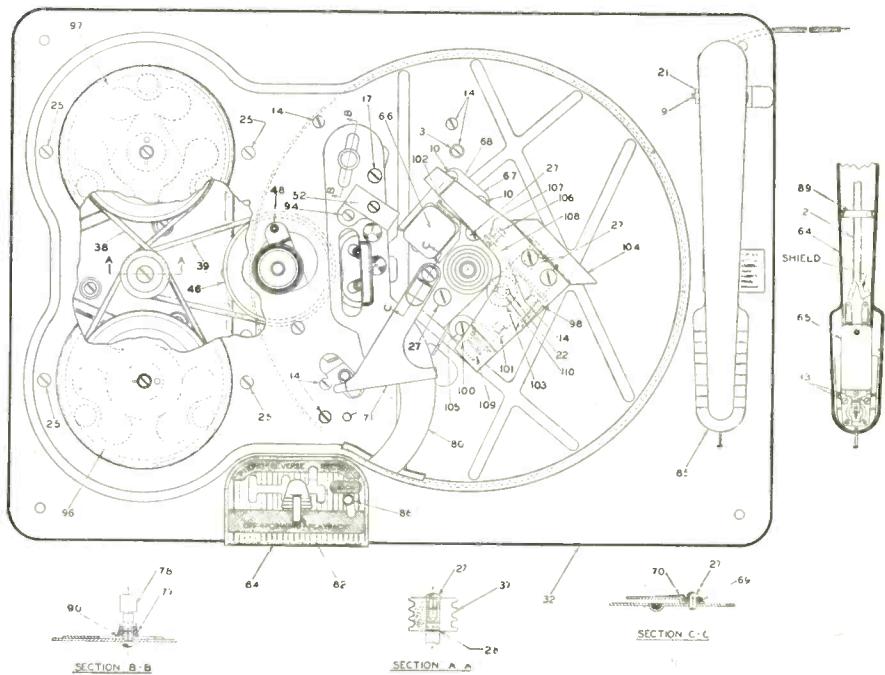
Top view of General Industries Model 250 Tape and disc recorder. Section views are indicated.
